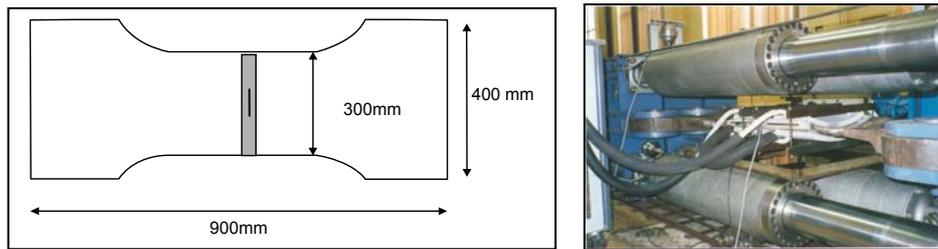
CWPT specimens geometry and test machine (Fairchild *et al* 2007)
